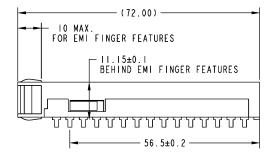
OSFP-RHS 2x1 bottom layer cage
